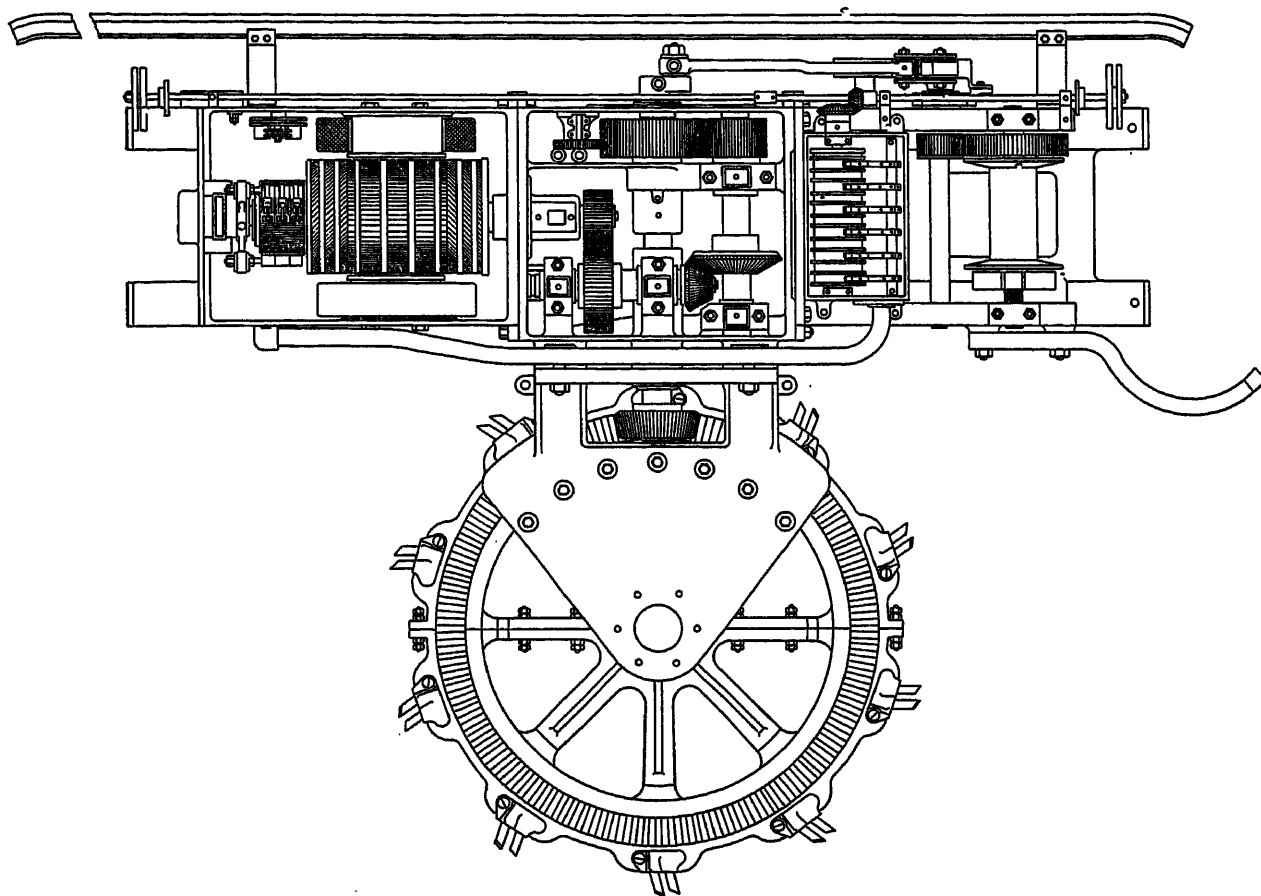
General arrangement of the "Crescent" coal-cutter; B type with d.c. motor.
